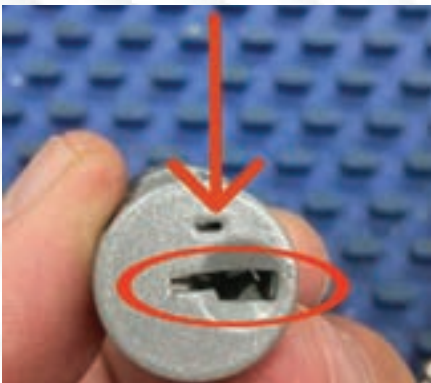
Turn the face of the cylinder clockwise until the slot for the learn tool is at 12 o'clock.
